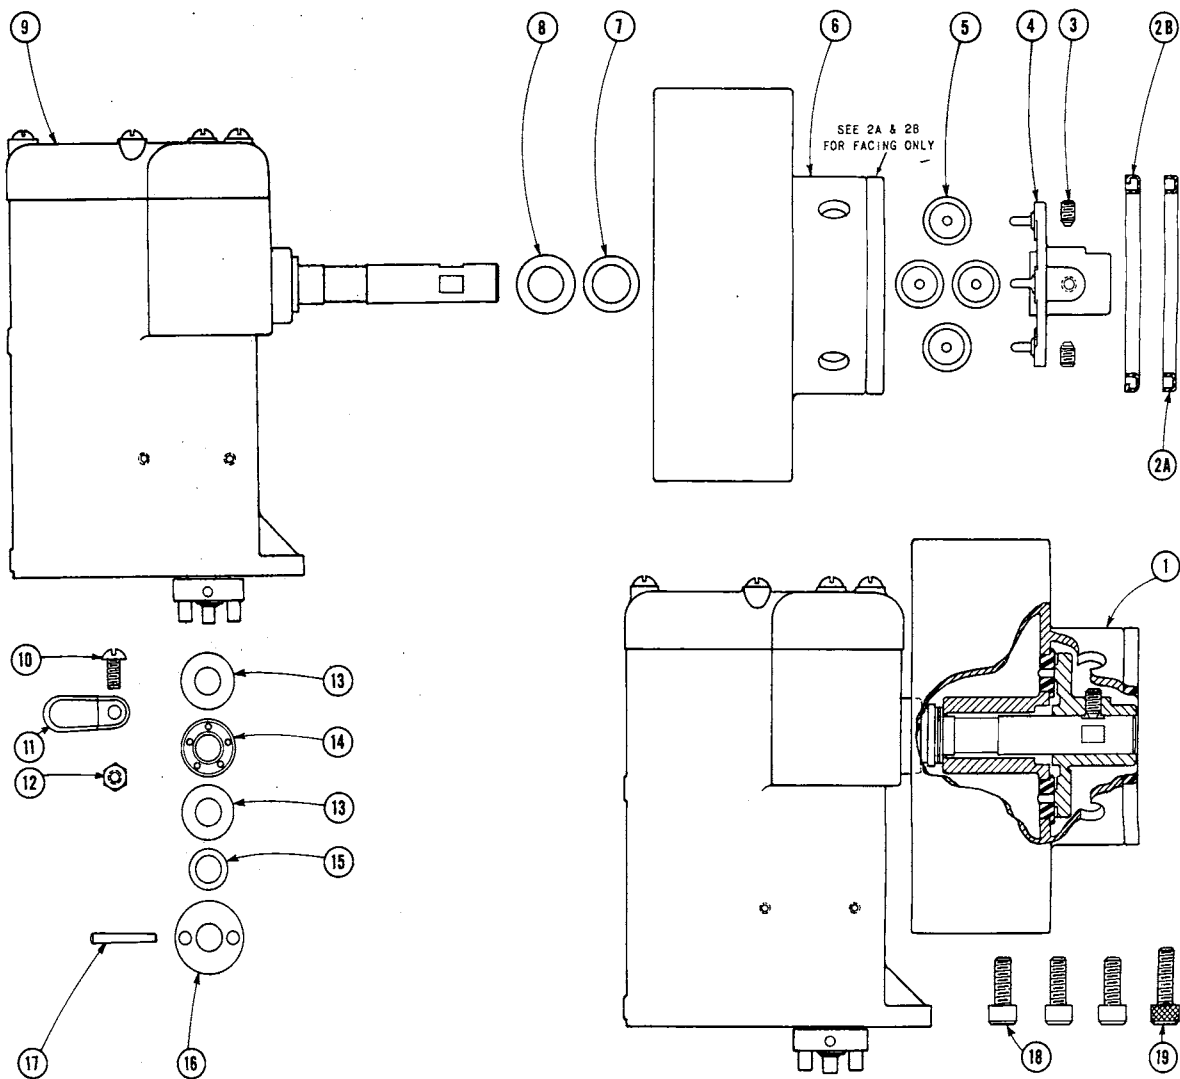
TURNTABLE & GEAR BOX ASSEMBLY
